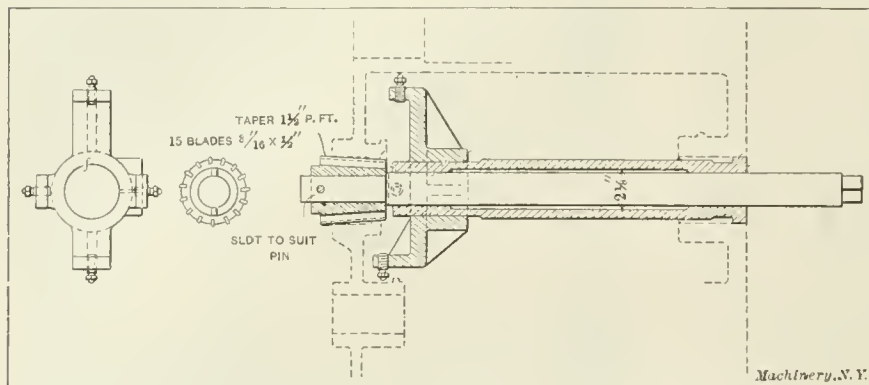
Reaming Jig for Locating and Supporting Hand Reamer in Spindle Bearings
